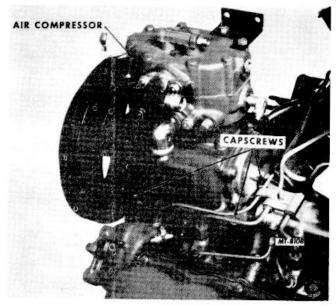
Air Compressor Mounting Capscrews 17. Loosen three capscrews and lockwashers and remove air compressor adapter plate and "O" ring from front cover (Fig. 30).
